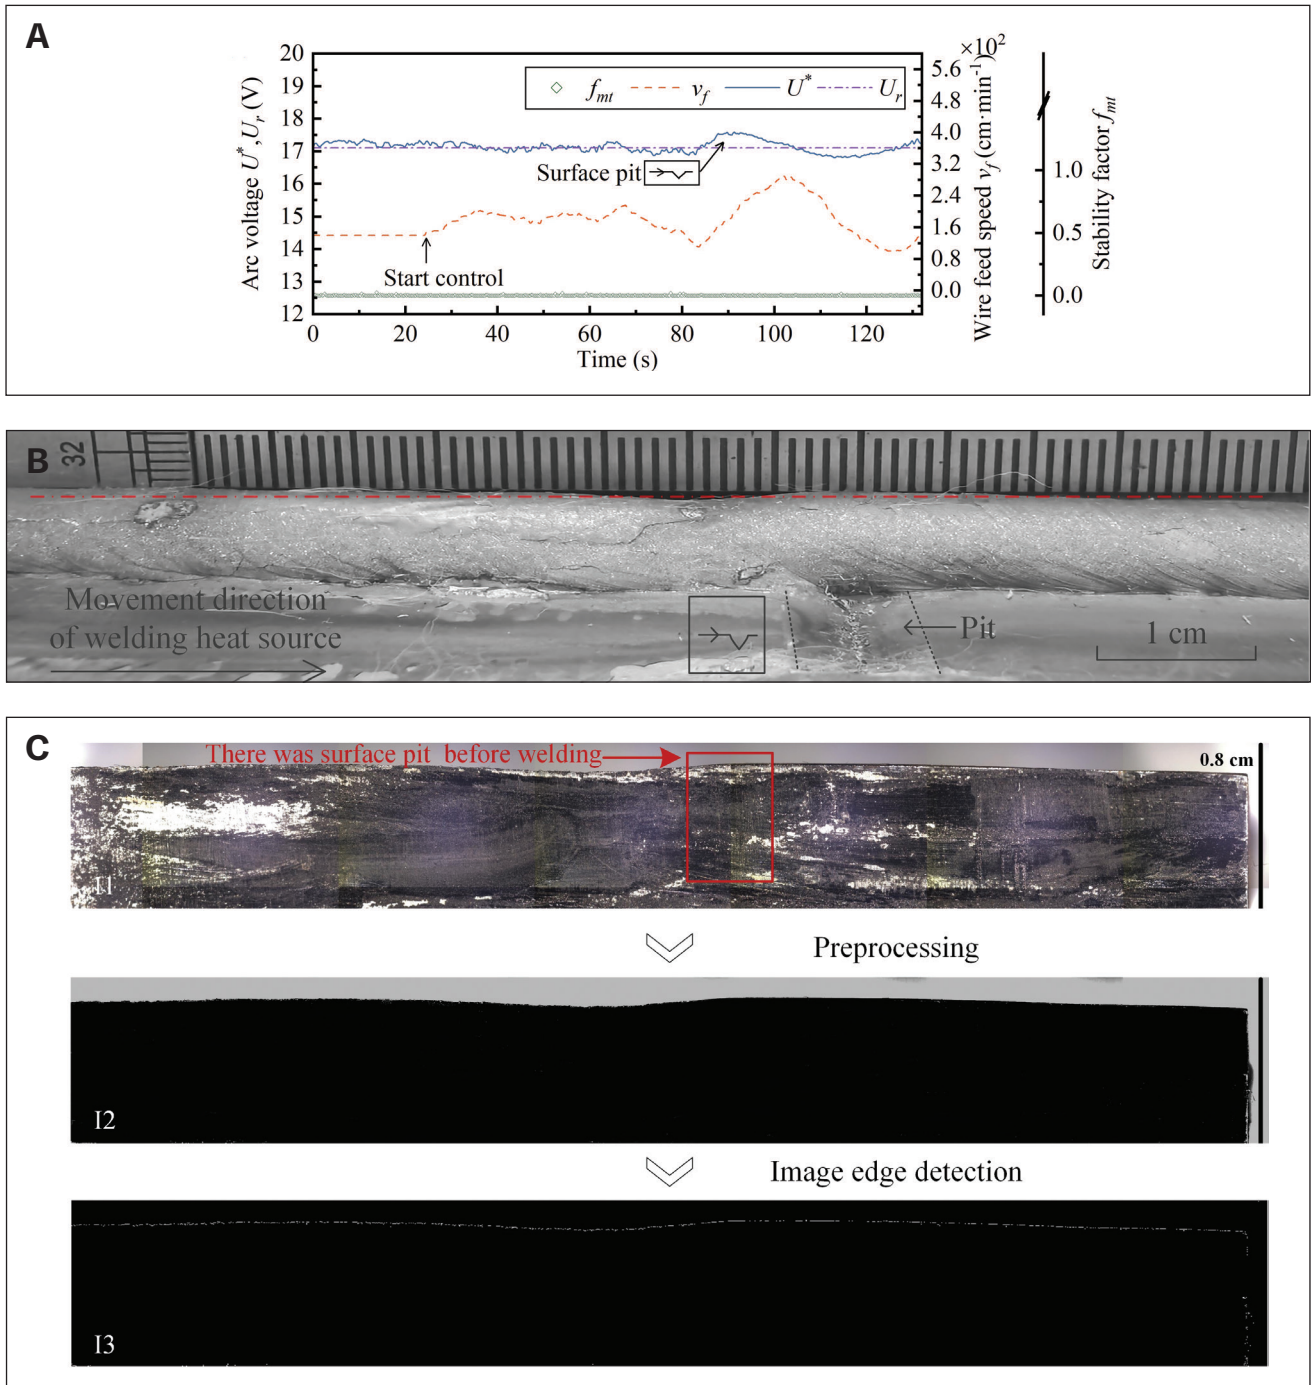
Control result of the weld surface height in Experiment E2: A – Experimental data; B – weld macromorphology; C – weld longitudinal section under a stereoscopic microscope or after image processing.
